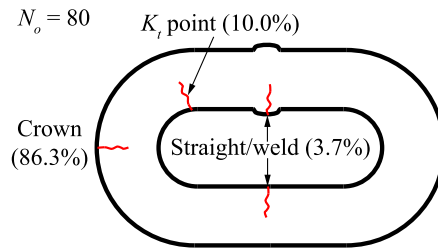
Obtained frequency of fracture locations from the  $N_o = 80$  fatigue testing results of retrieved corroded chains.
